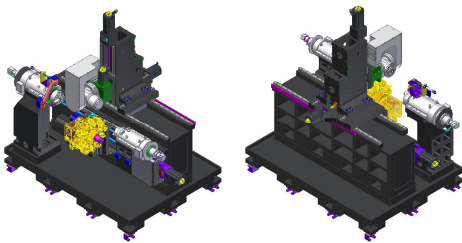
Modeling 8 Axis Multi-Tasking Machine
